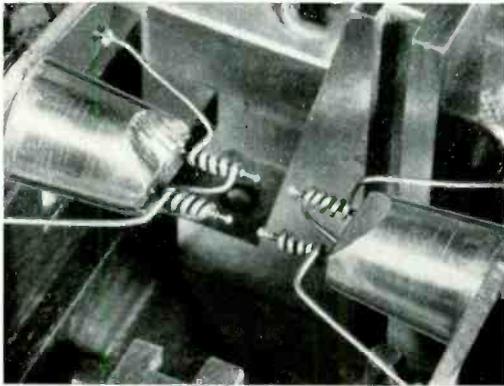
Close-up of lead wire soldering tool to show details of soldering noses. The fixture provides for soldering all four wires to the disks simultaneously
